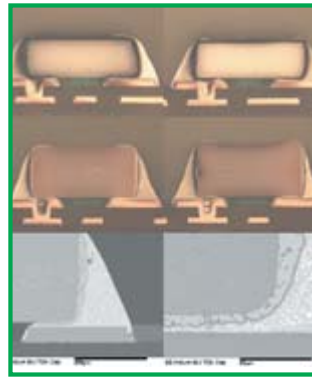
Cross sections and SEM pictures for Sn/Pb 0201 solder joints.
